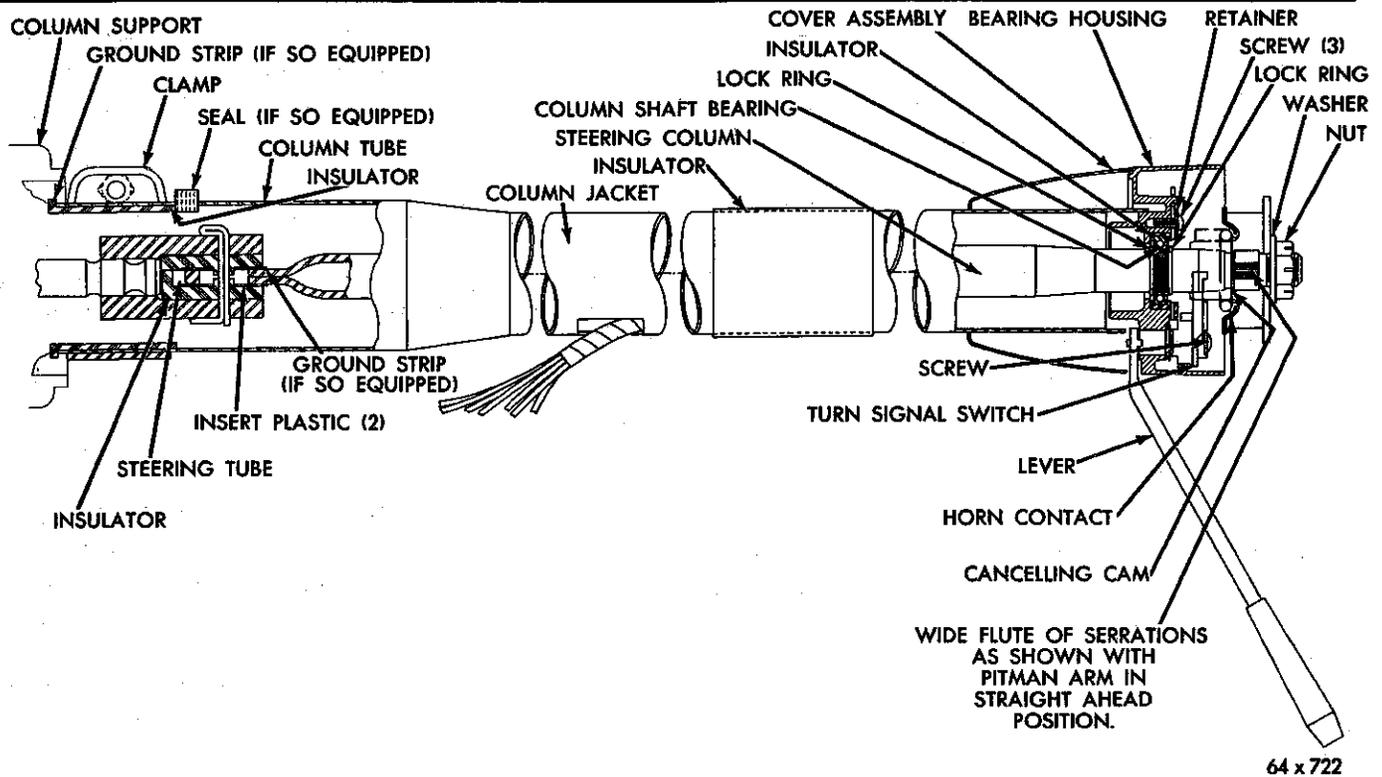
Jacket Tube and Column Tube—Cross Section (Chrysler)
